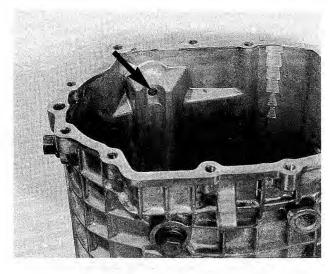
Area of front transmission case (arrow) requiring gasket sealer.
